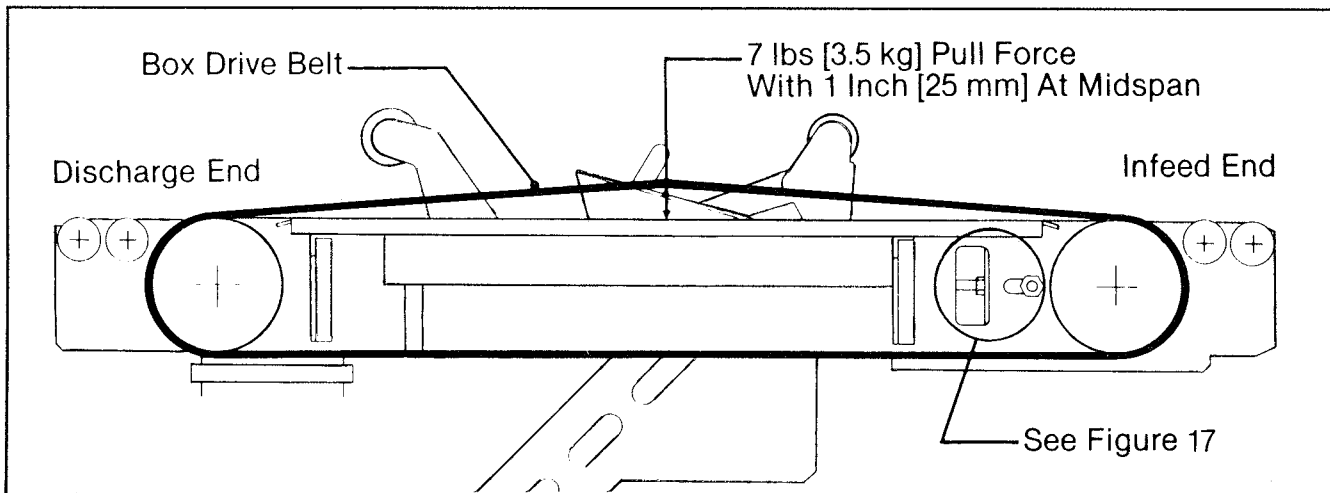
Box Drive Belt Tension Adjustment - Left Side View
